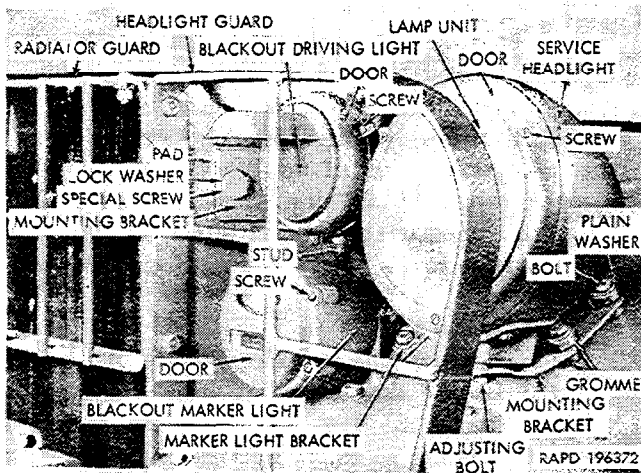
Service headlight, blackout driving lights, and blackout marker light.
